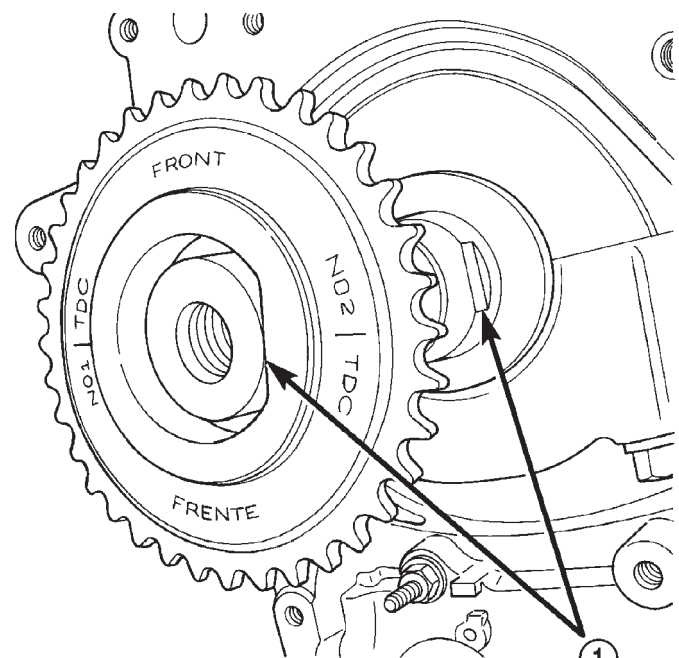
Balance Shaft Sprocket Alignment to Crankshaft
